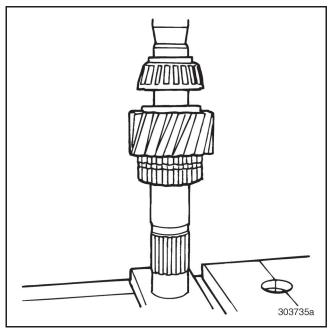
Pressing Rear Bearing Cone onto Shaft
